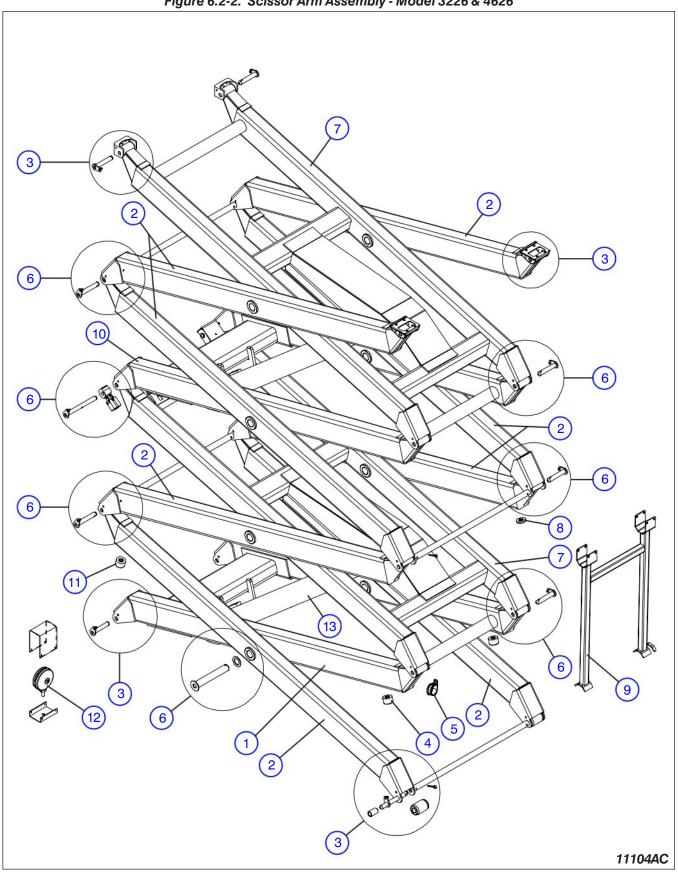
Scissor Arm Assembly - Model 3226 & 4626
